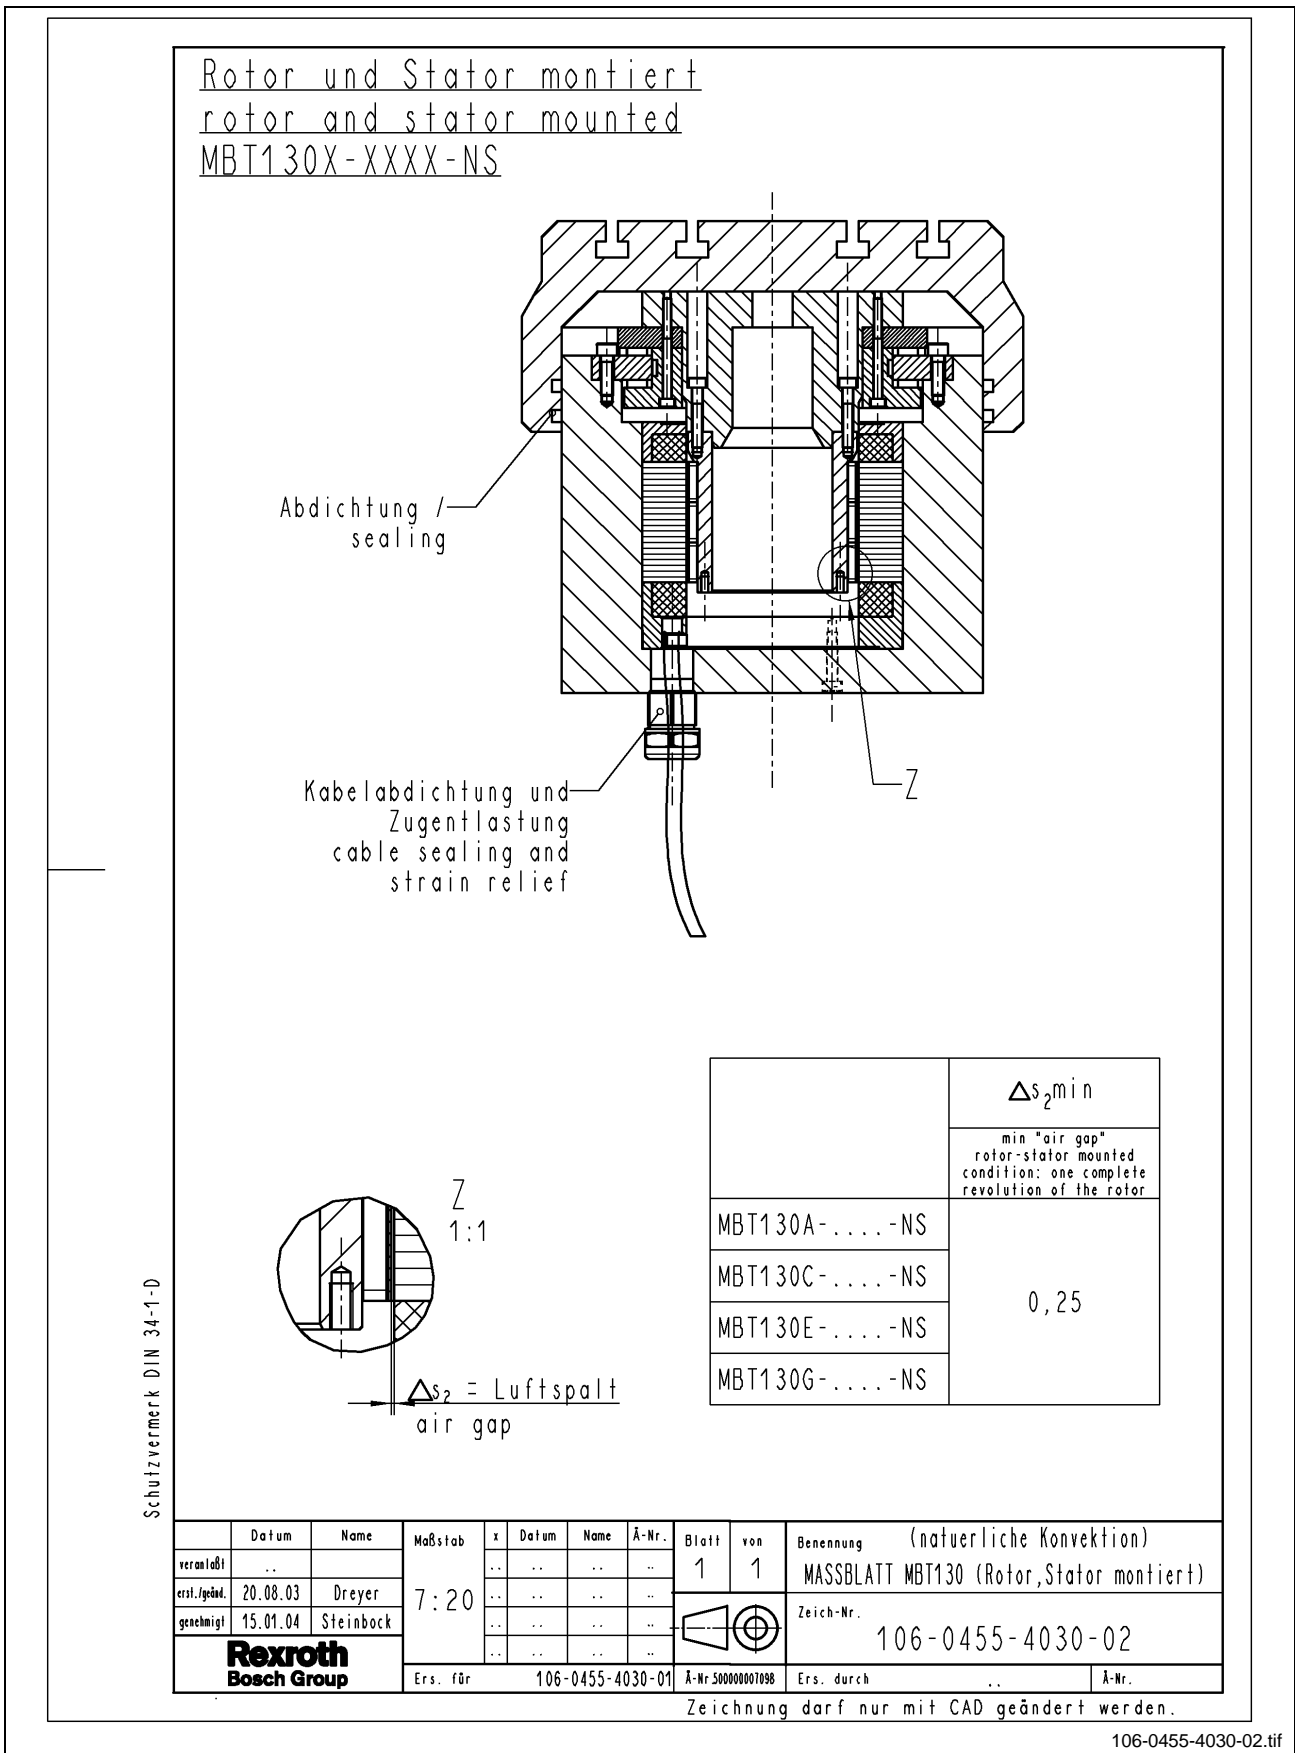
Dimension sheet Rotor and Stator (nat. convection), mounted
